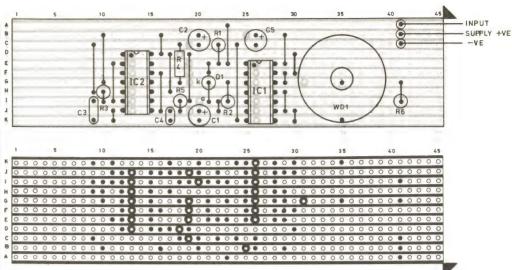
Two-Tone Siren Alarm stripboard component layout and underside copper break details.
